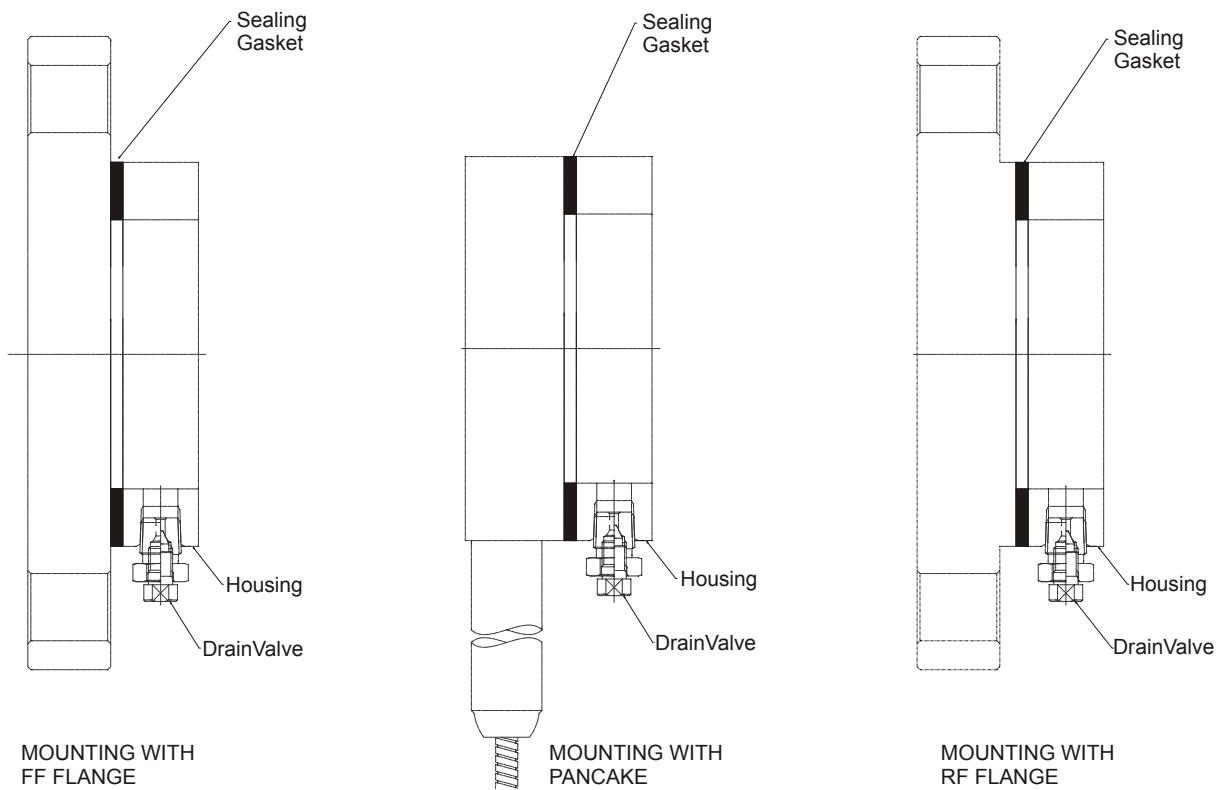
Exploded View - Mounting with Gasket and Drain Valve
